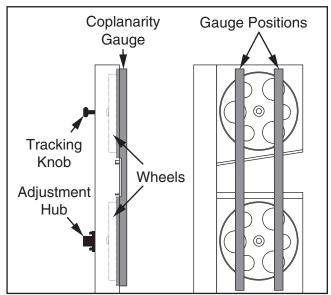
Illustration of using coplanarity gauge to check wheel alignment.
